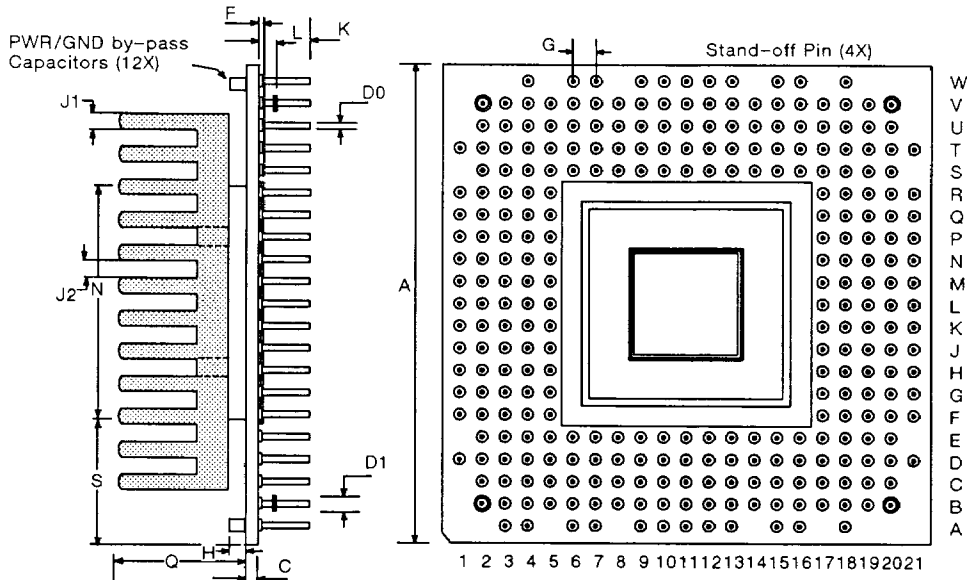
289 PIN GRID ARRAY PACKAGE WITH OPTIONAL HEAT SINK
